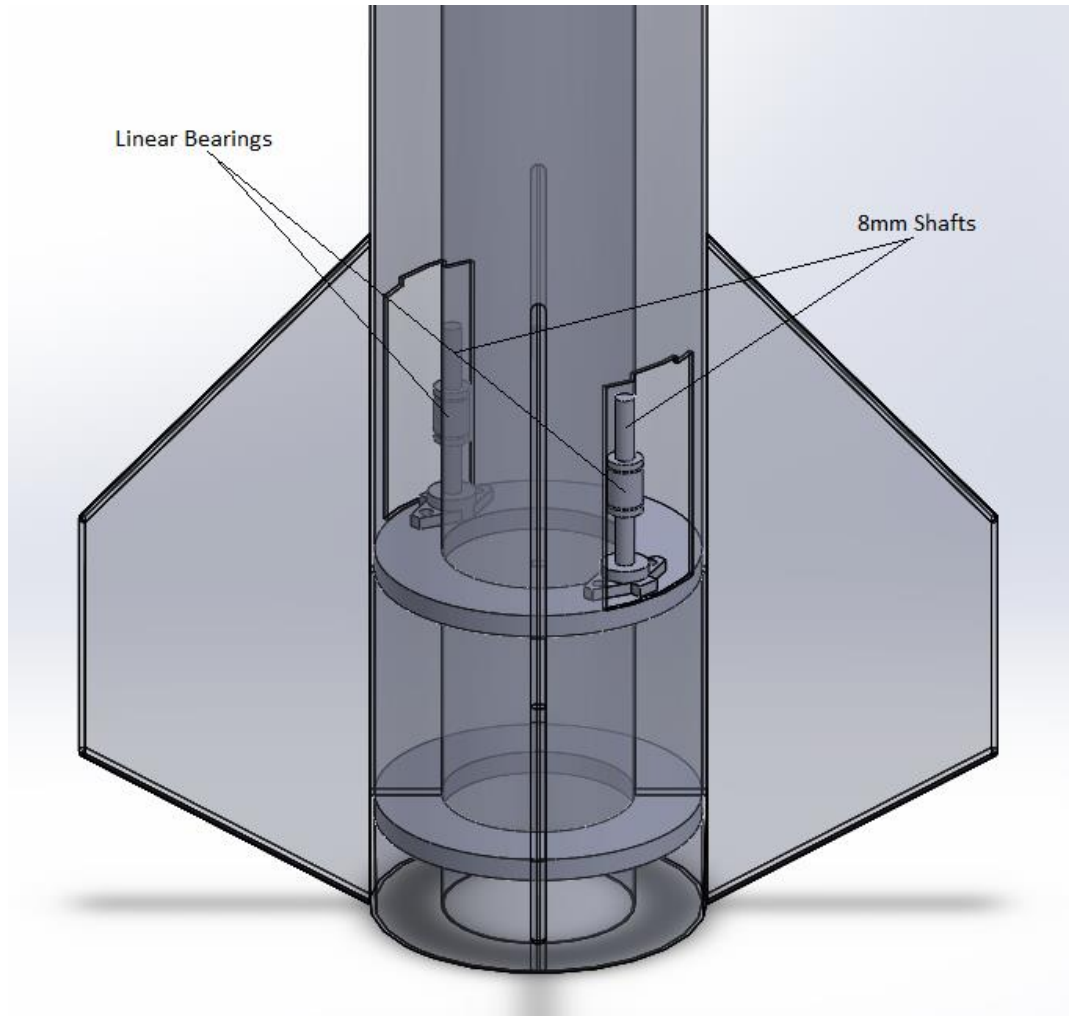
Mounting of 8mm Shafts with Linear Bearings in Flanges
